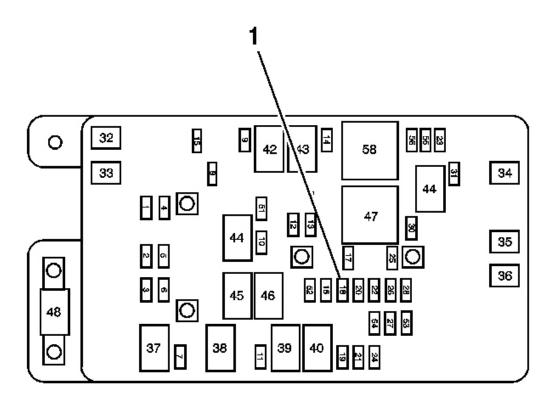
View Of Fuse & Relay Block Courtesy of GENERAL MOTORS CORP.
